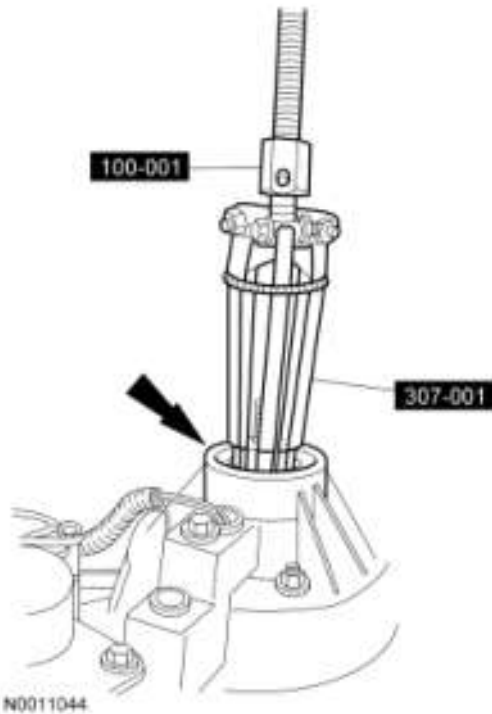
Removing Rear Output Shaft Oil Seal Using Special Tools (100-001, 307-001)
